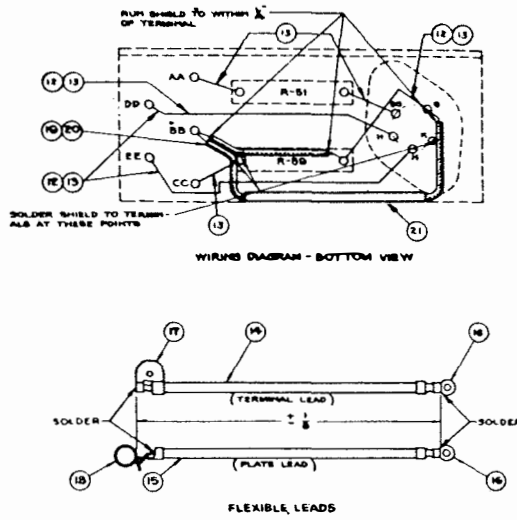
Vacuum tube keyer unit wiring diagram (bottom view) and flexible lead details
